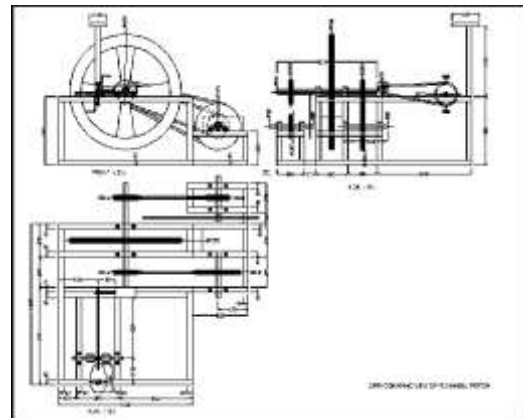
Orthographic View of Multiple bar Dwell Mechanism actuated Pedal Flywheel Motor
